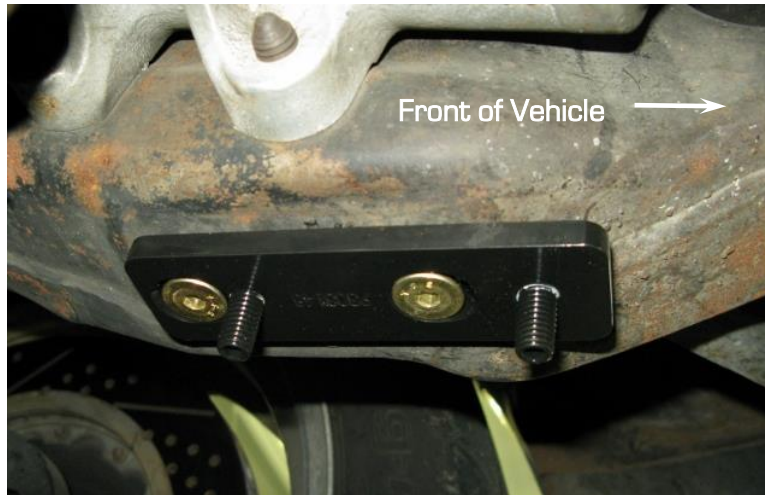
Mounting the Adapter Plate (1964-67 A-Body)
